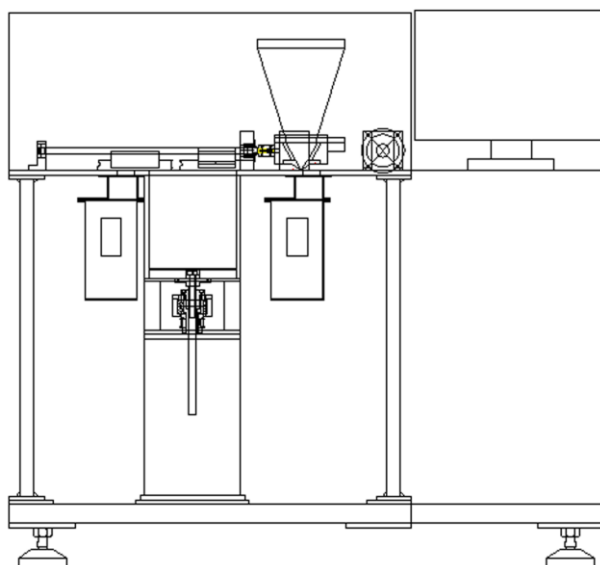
The mechanical structure drawing of self-developed 3DP machine
